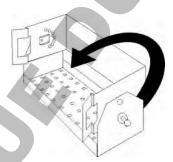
Test Tube Rack Holder with Rack Removed and Bed Rotated 90°
